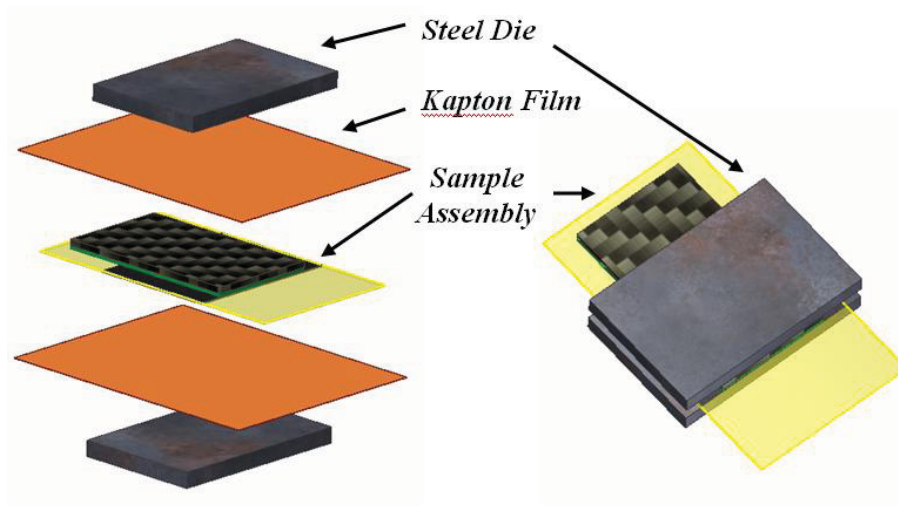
Exploded and un-exploded views of assembly press for adhesion samples. Kapton film not shown in un-exploded view for purpose of visualization.
